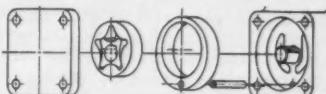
Nichols Integral pump-package is easily installed integrally into most mechanisms.
